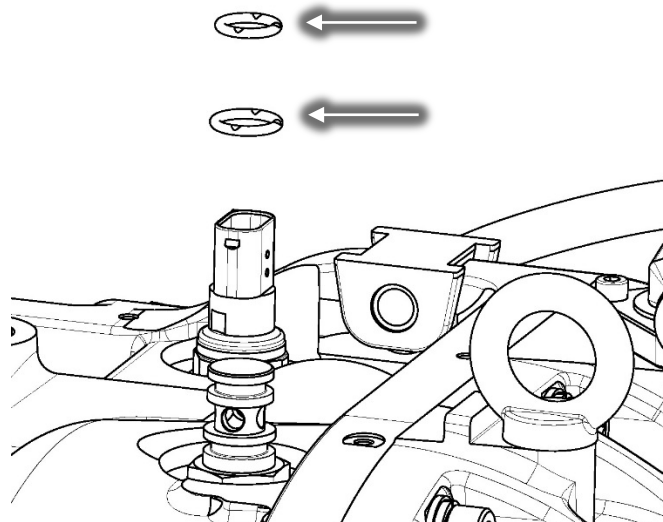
SCR Manifold Brass Fitting O-ring Removal
